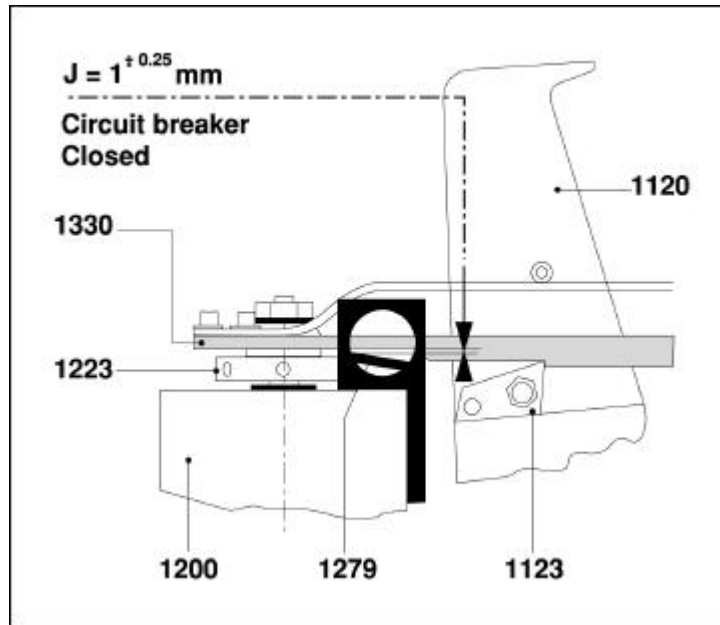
Clearance $J = 1 \pm 0.25$ mm reading taken with the circuit-breaker closed
